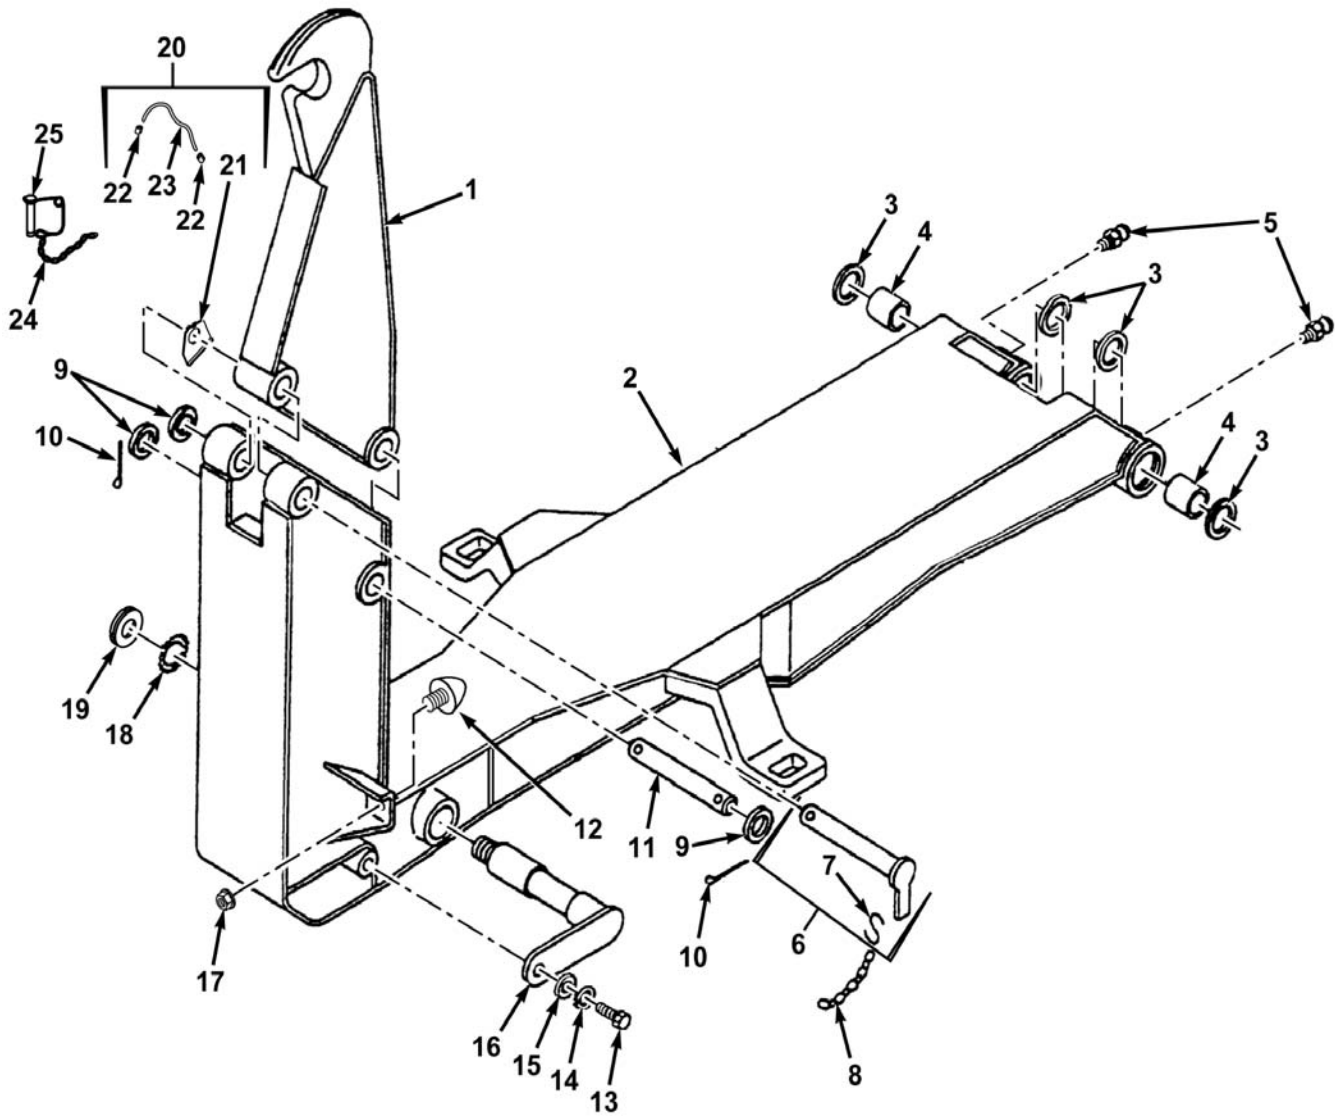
LOAD HANDLING SYSTEM ASSEMBLY (SHEET 1 OF 3)
